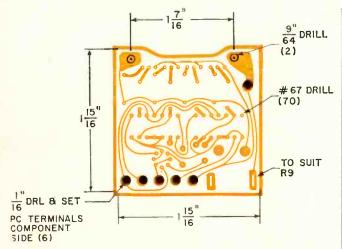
This 1 15/16"- square PC board will mount on meter.
